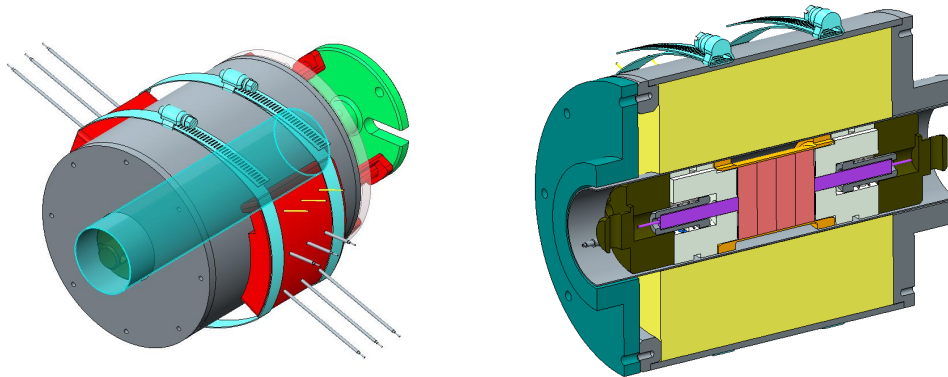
The initial design of the SPE5 sub-scale assembly shows the aluminum canister with end caps to facilitate the PBXN-110 fill while utilizing the booster tube for insertion of the booster assembly.
